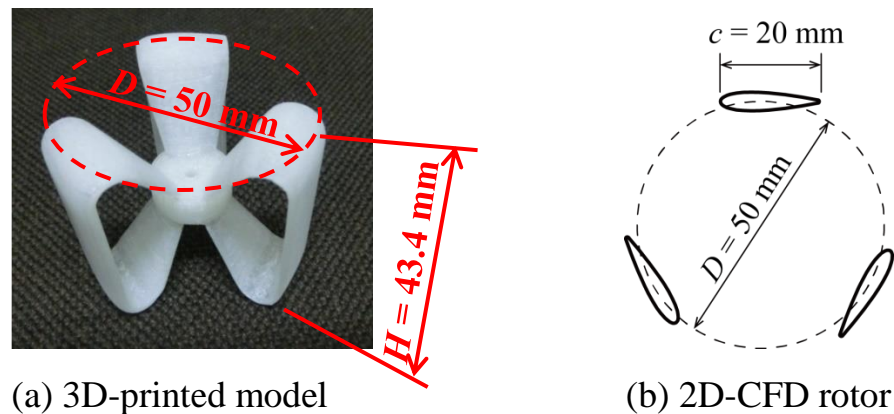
Target rotors of this study: (a) Three-dimensionally printed model (3D-EXP rotor); (b) 2D-CFD rotor used for CFD analysis.
